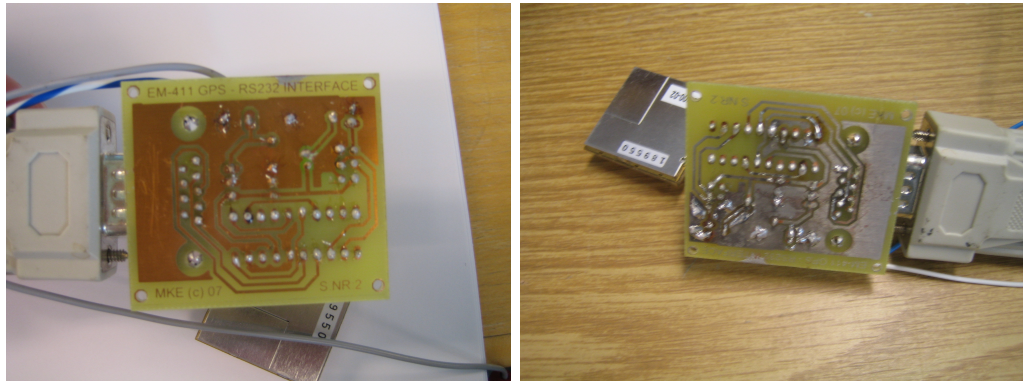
The soldering side of the GPS board. Left: before resoldering. Right: after.
